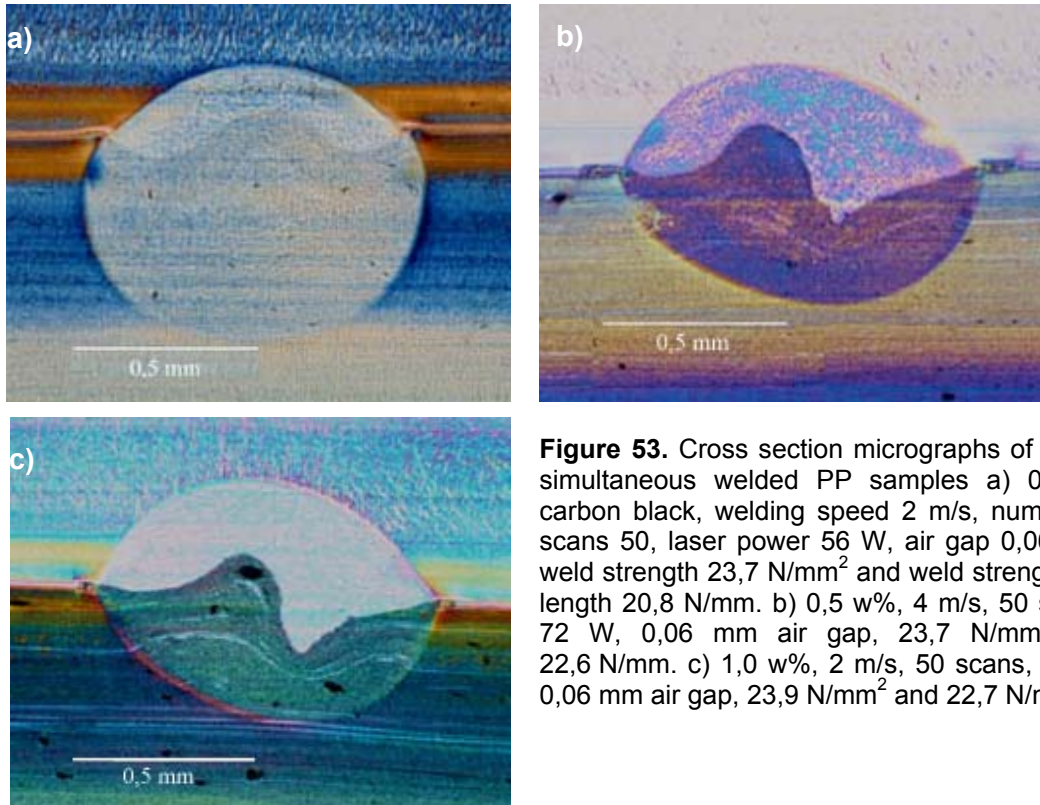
Cross section micrographs of quasi-simultaneous welded PP samples a) 0,1 w% carbon black, welding speed 2 m/s, number of scans 50, laser power 56 W, air gap 0,06 mm, weld strength 23,7 N/mm² and weld strength per length 20,8 N/mm. b) 0,5 w%, 4 m/s, 50 scans, 72 W, 0,06 mm air gap, 23,7 N/mm² and 22,6 N/mm. c) 1,0 w%, 2 m/s, 50 scans, 48 W, 0,06 mm air gap, 23,9 N/mm² and 22,7 N/mm.
